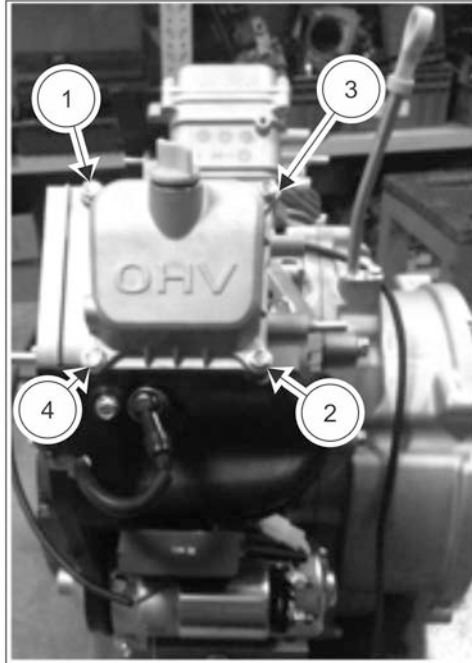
VALVE ADJUSTMENT BOLT TORQUE SEQUENCE
